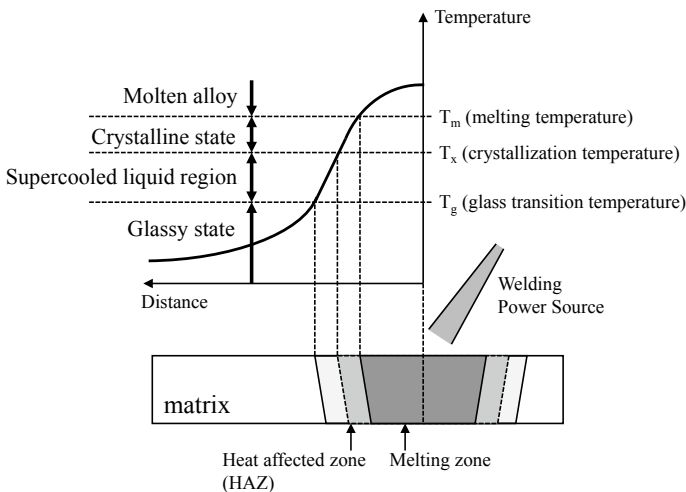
Cross-sectional view of the glassy alloy, showing the temperature gradient from the melting zone heated by welding power source
